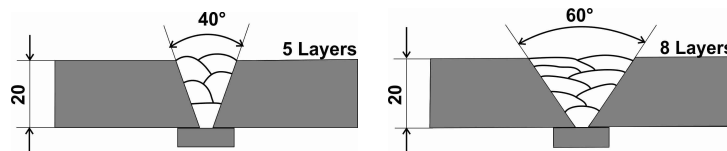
Comparison of joint design for modified (left) and standard (right) spray arc welding [58]
